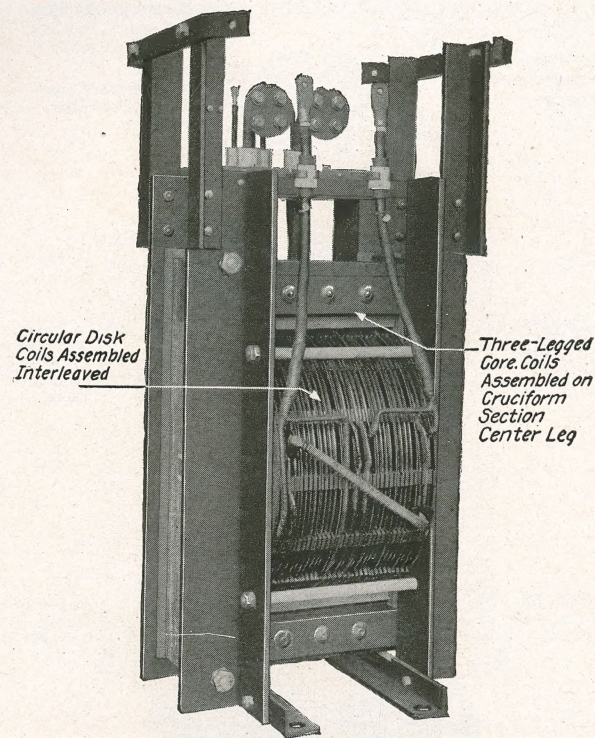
SINGLE-PHASE INTERLEAVED DISK COIL DESIGN, USING THREE-LEGGED CORE
